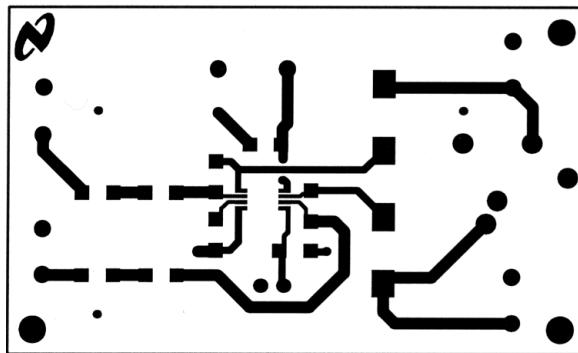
Recommended DGK0008A PC Board Layout Component-Side Layout
